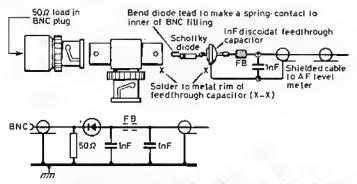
Exploded view of a detector and 50Ω load using a BNC T-fitting
